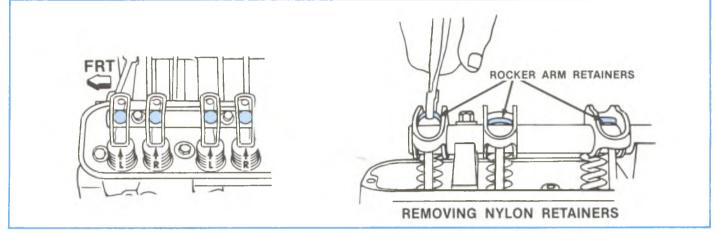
, 1985 and Later Rocker Arm Assembly.
